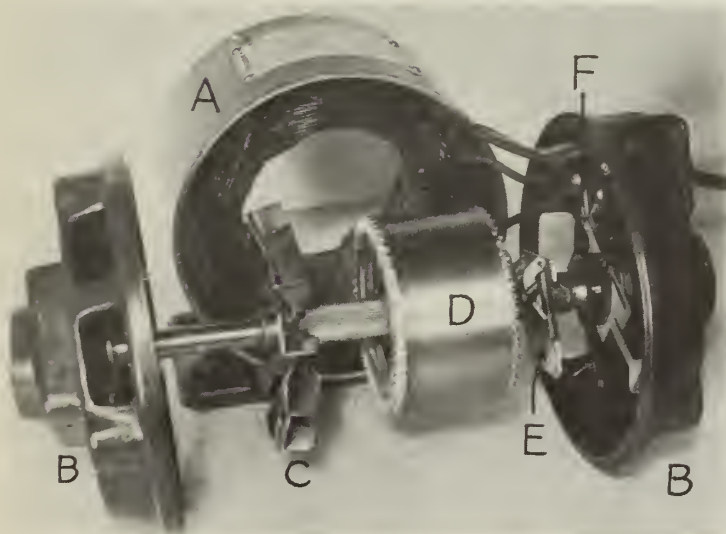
A motor with a squirrel-cage rotor disassembled to show the various parts: A, stator and coils; B, end bells, showing openings for ventilation; C, fan for circulating air over coils; D, squirrel-cage rotor; E, centrifugal device for opening switch on starting coils after motor gets up to speed; F, switch for cutting off current to starting coils.
